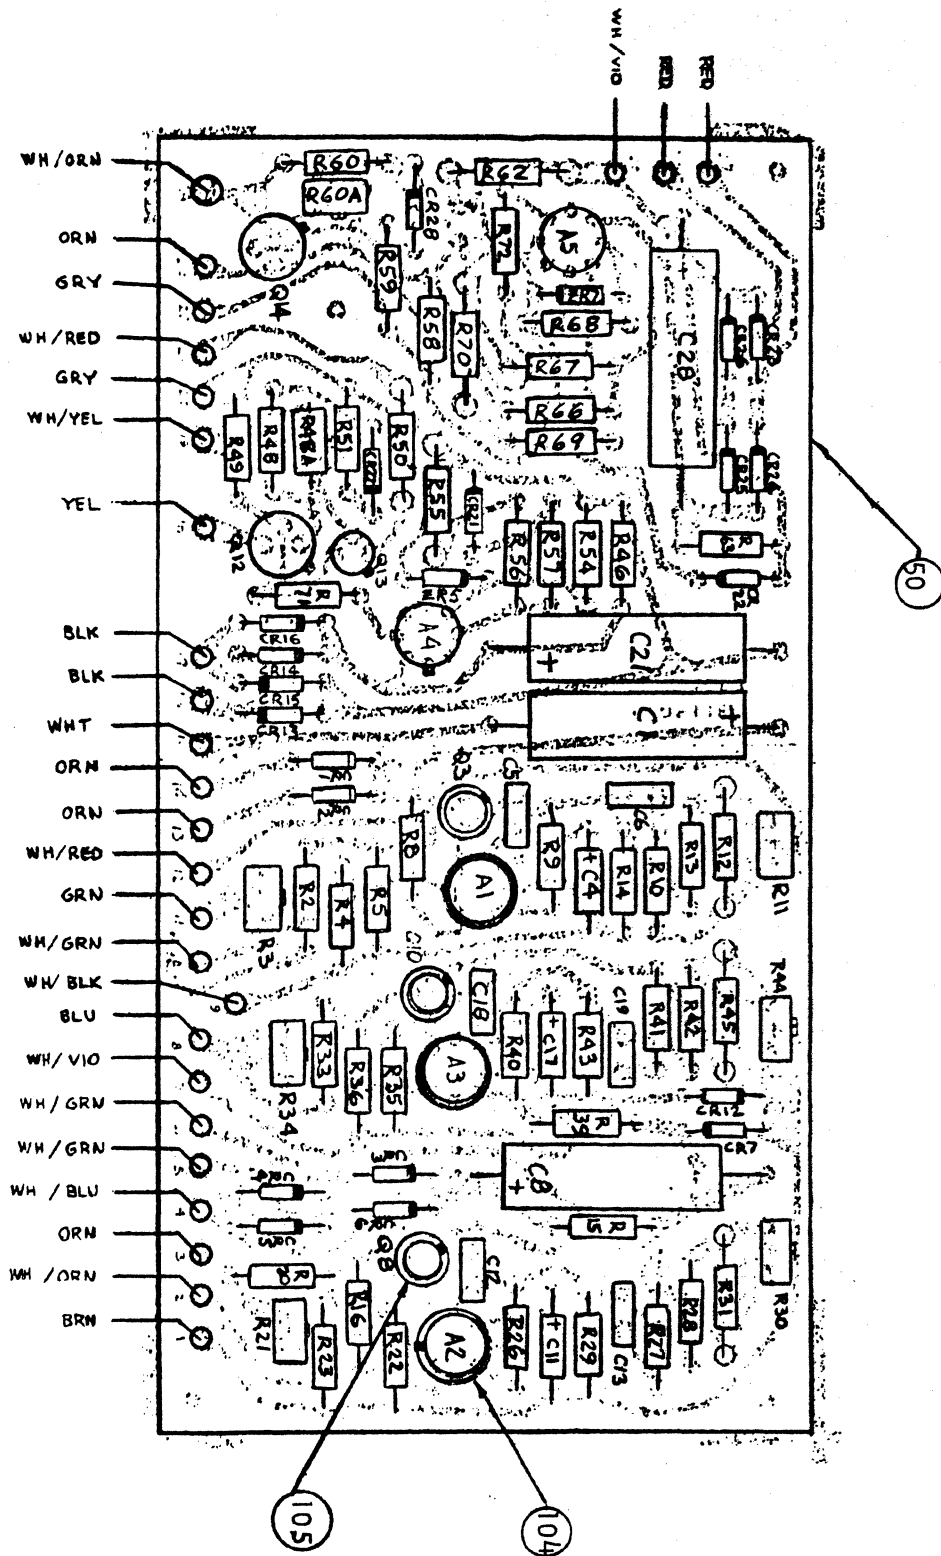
BOTTOM VIEW, WIRING (SHEET 3 OF 6)
